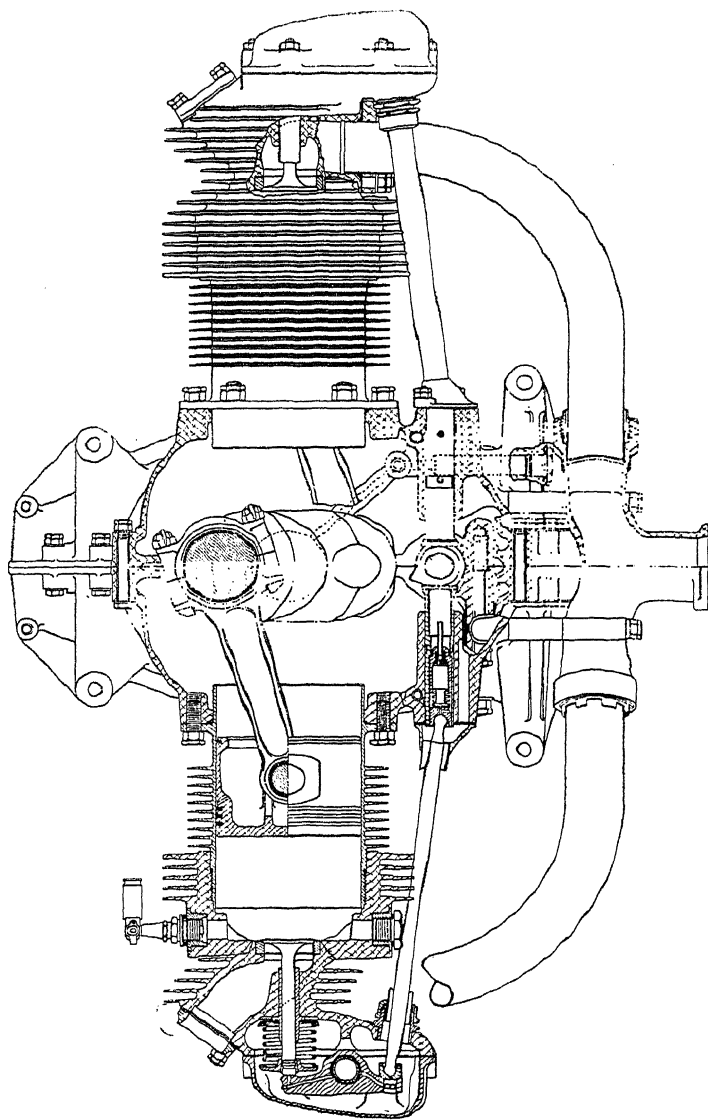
The Continental four-cylinder opposed engine in sectional view.
